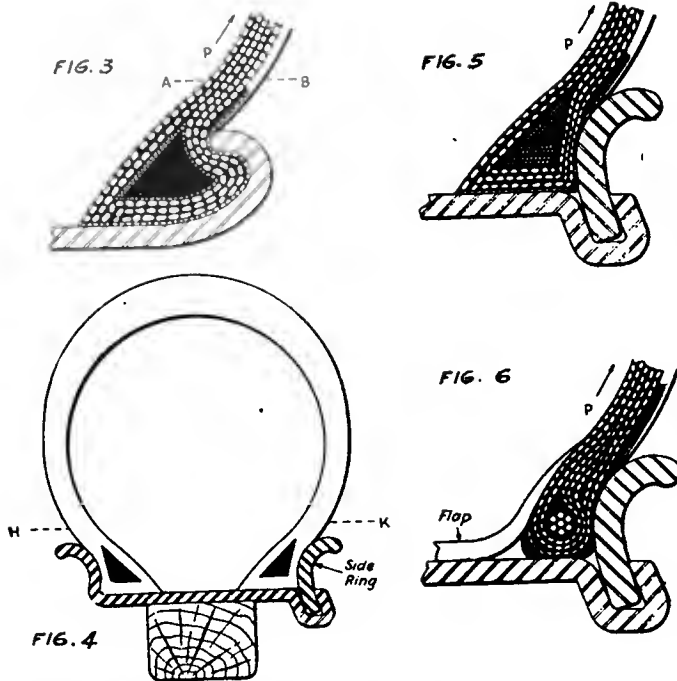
Details of clincher rim and bead. Fig. 4—Straight-side tire mounted on two-piece detachable rim. Fig. 5—Inextensible braided-wire bead. Fig. 6—Inextensible twisted-wire bead
